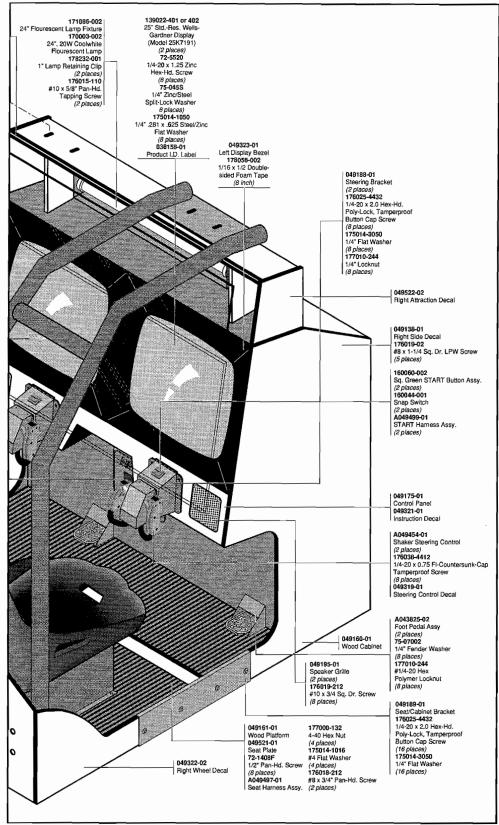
Cabinet-Mounted Assemblies, Front View A049150-01 C
